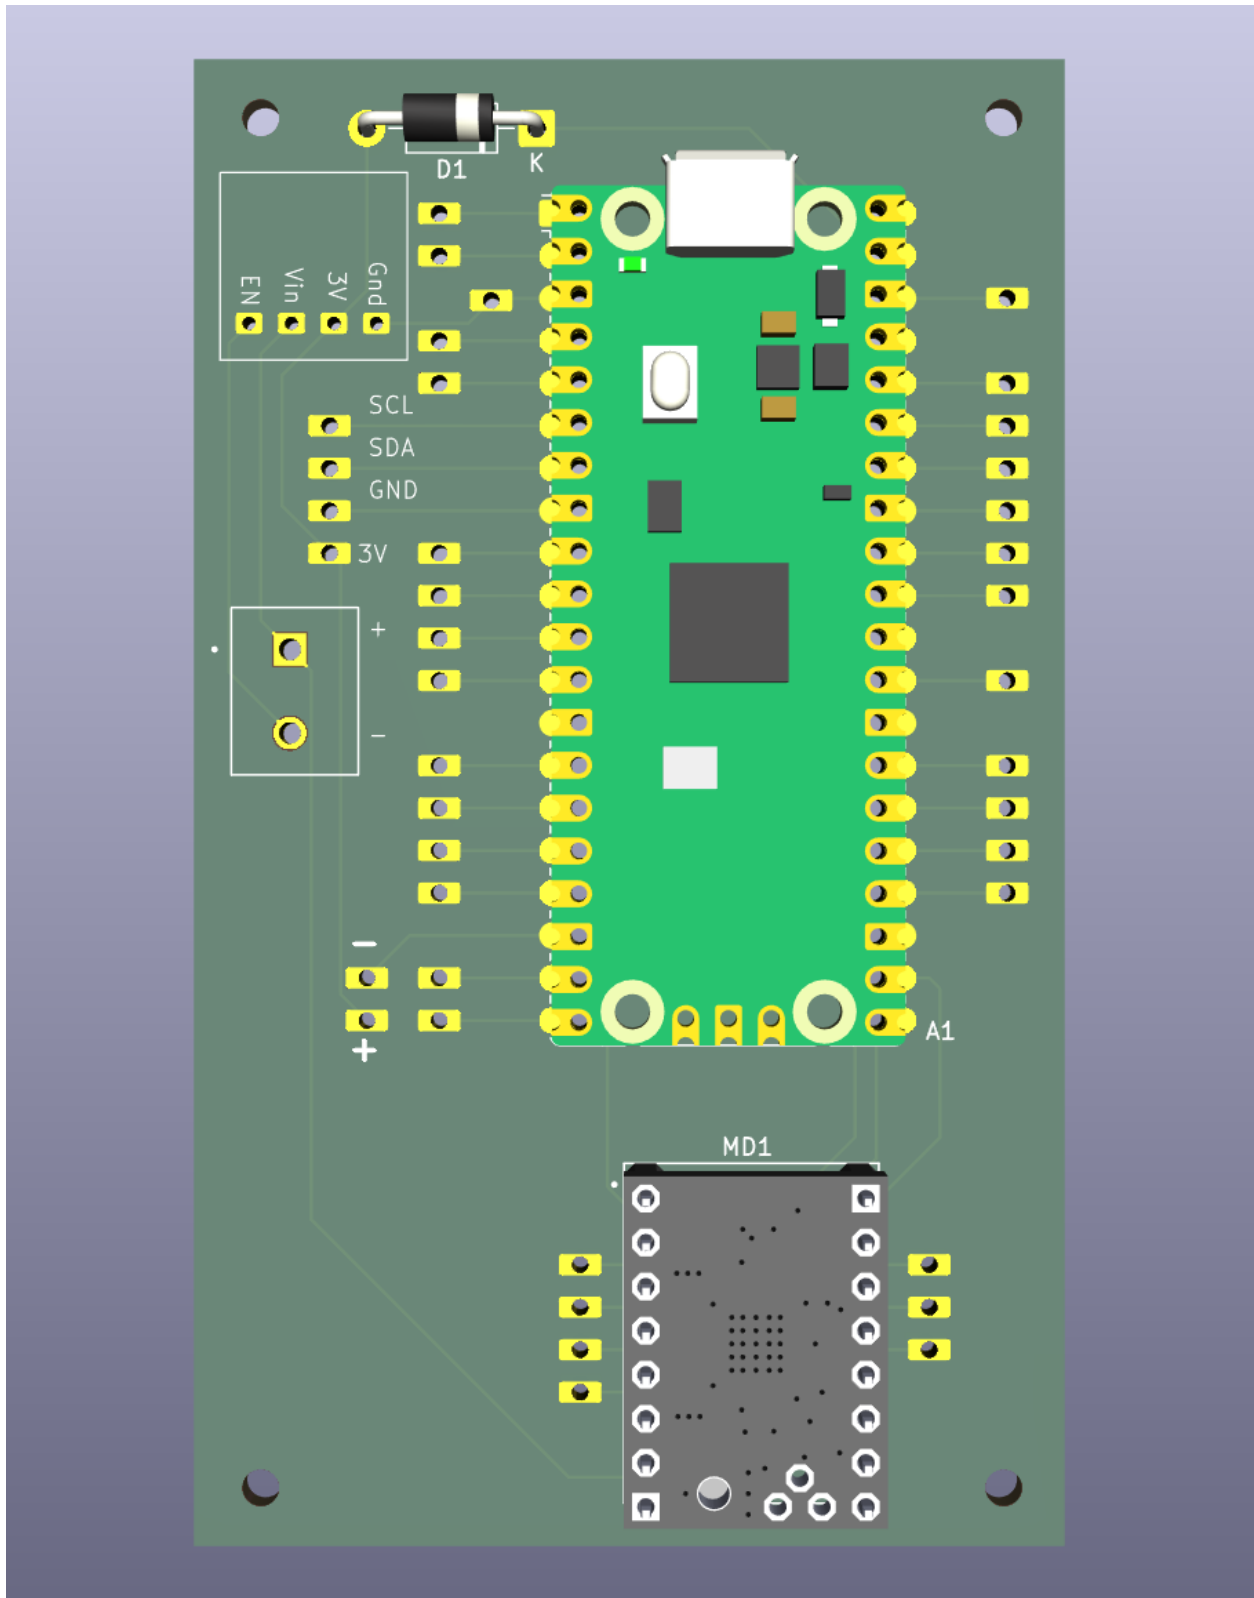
PCB 3D Render Populated Board with RP2040 and TMC2209 Stepper Driver
